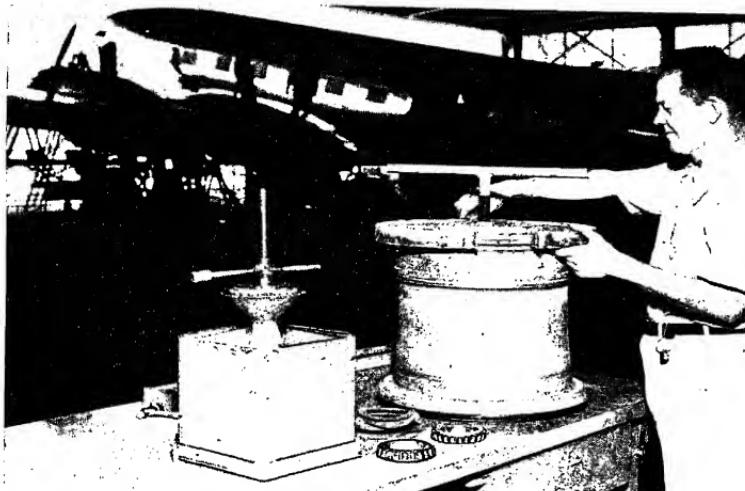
Two handy pieces of service equipment—a puller and a grease gun.
